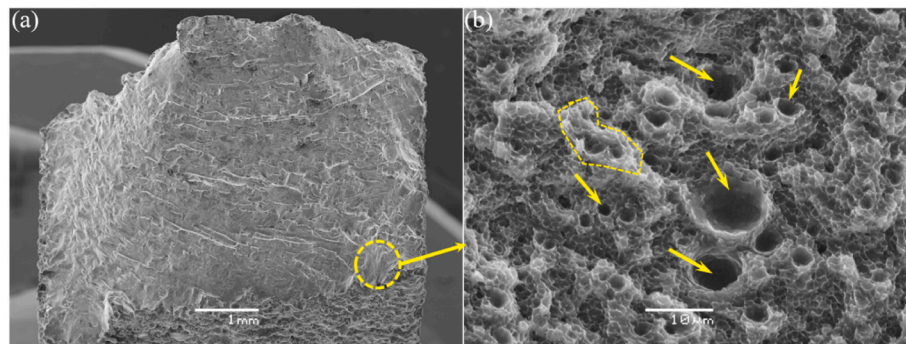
SEM micrograph of fractured surface of a ZX specimen: (a) cross-section view and (b) dimple fracture; arrows show the dimples, and the dashed line shows coalescence of fine micro-size dimples.
